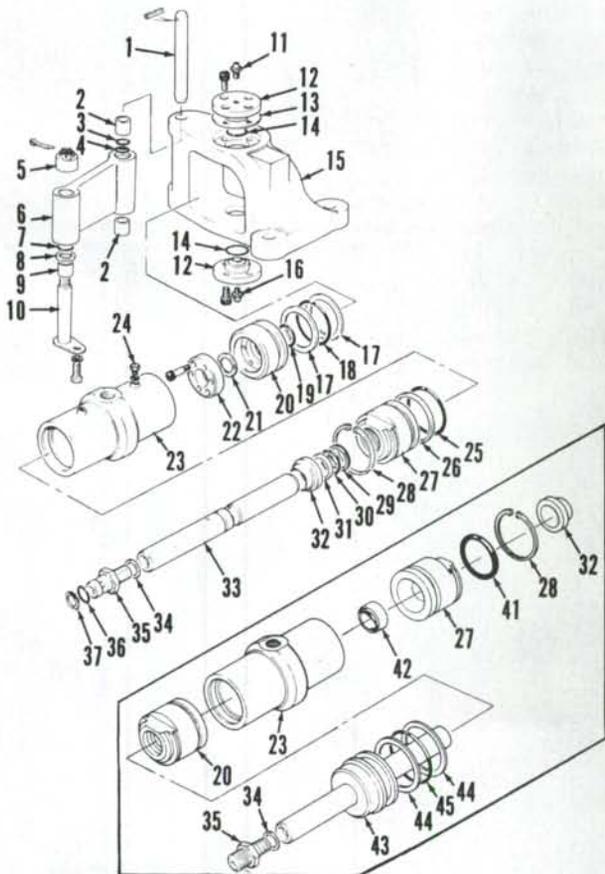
Exploded view of steering cylinder used on models equipped with David Brown front drive axles.
